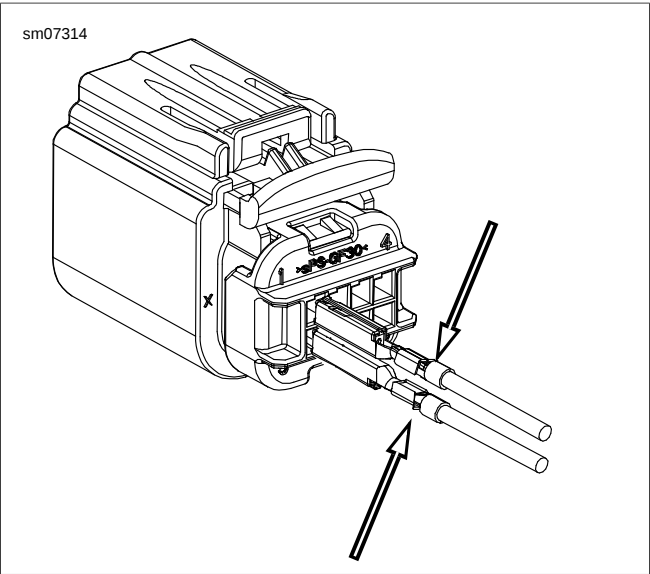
Socket Terminal Orientation: Crimp Open Side
